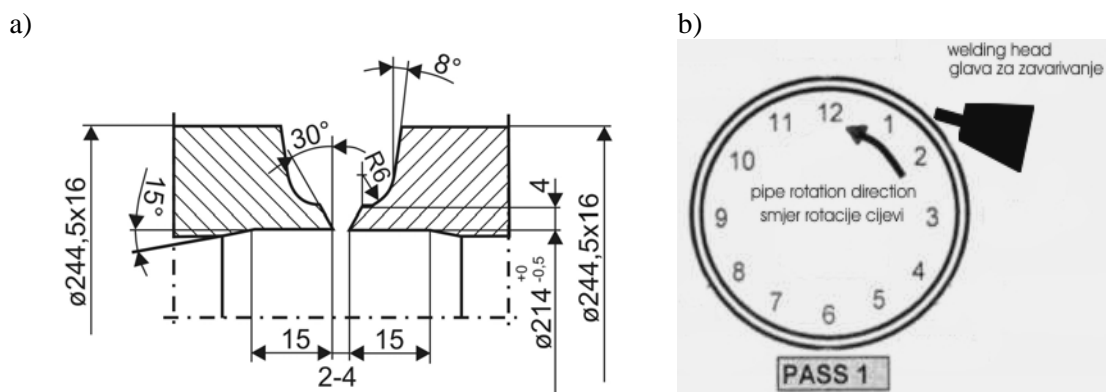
Shape and dimensions of the butt joint on a pipe section (a) and the position of the welding head during the cycle (b)
